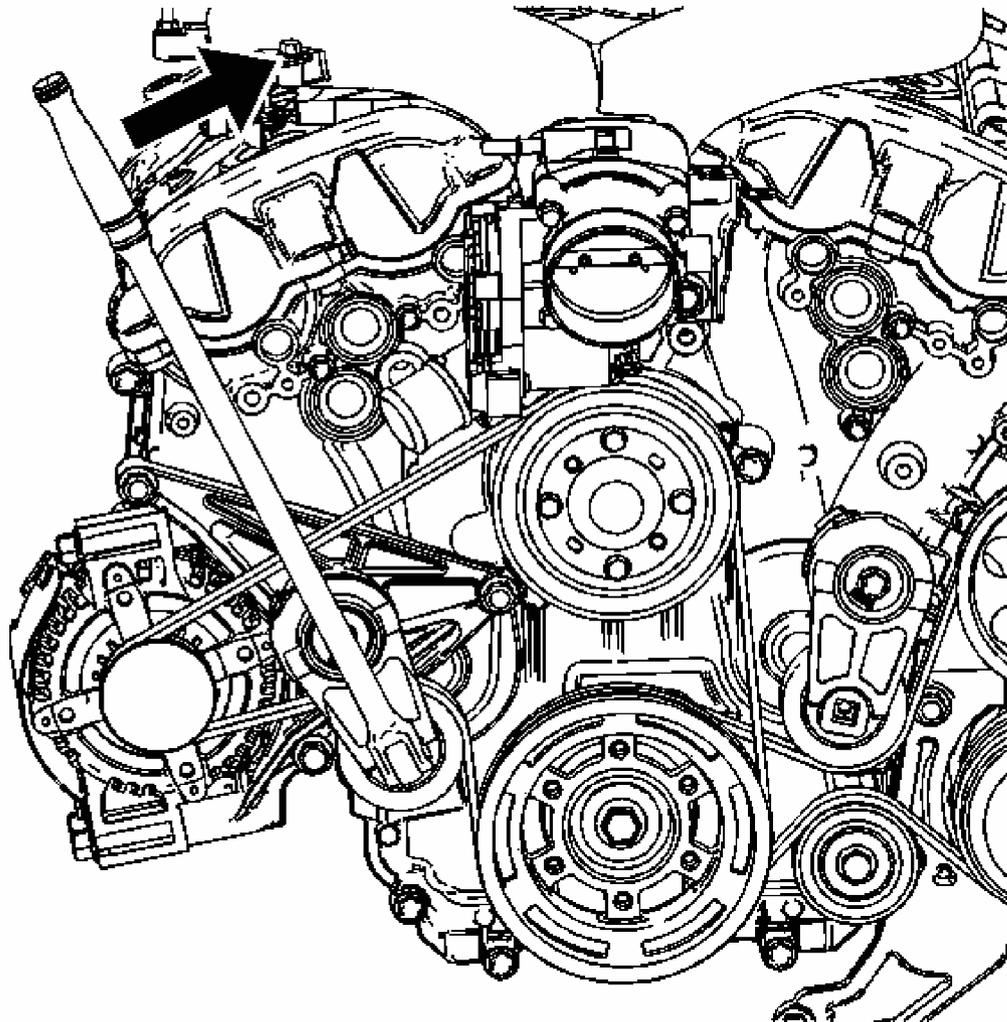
Removing/Installing Generator & Water Pump Drive Belt
